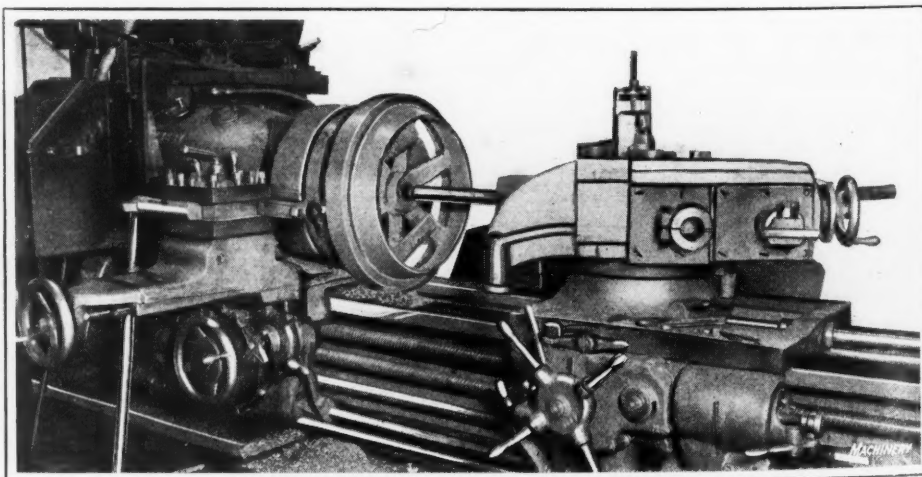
Turret Lathe equipped for finishing the Combined Clutch Cone and Gear
